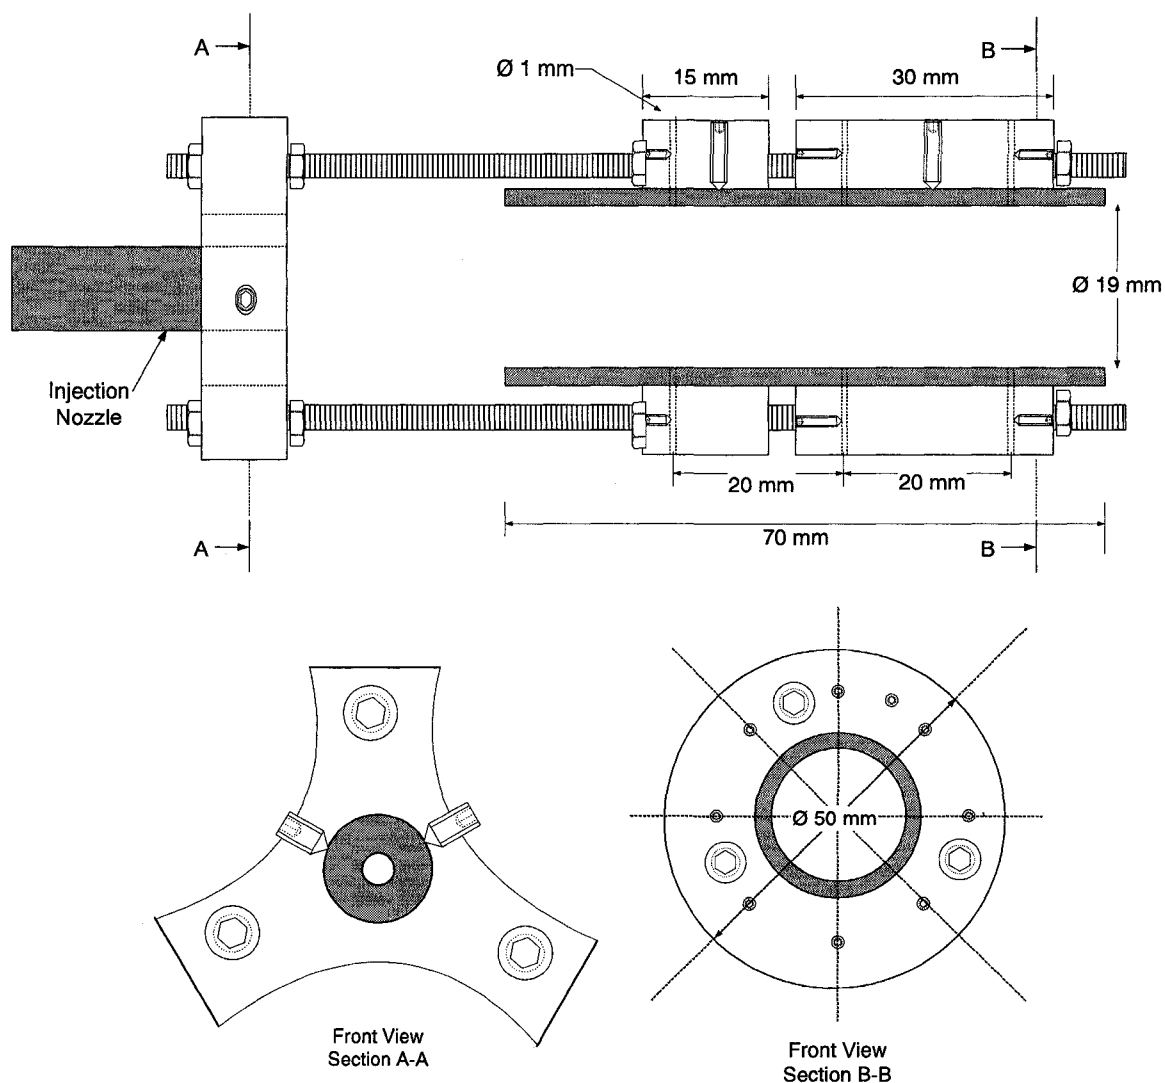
Holder Used to Align Draft Tube with Injection Nozzle and to Position Thermocouples Inside the Draft Tube
